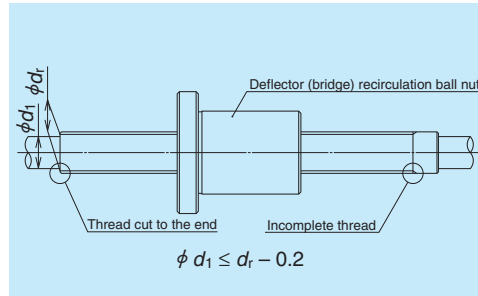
Shaft end of a deflector (bridge) recirculation system ball screw
